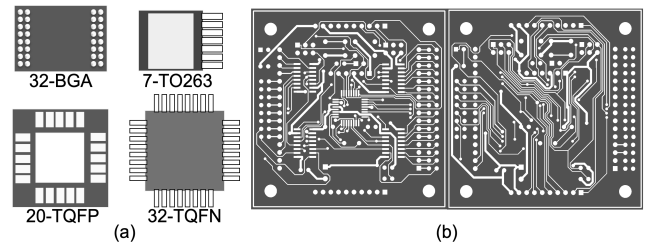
Metals on PCBs: (a) footprints of PCB components (ICs) in 4 different packages; (b) metal traces of a random PCB [lighter area refer to the metal].
